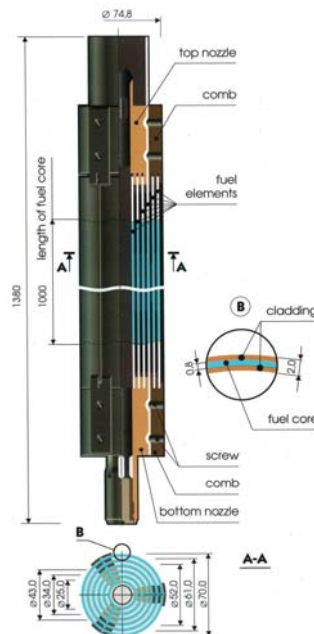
MR-6 type fuel element (dimension in mm) [6]
